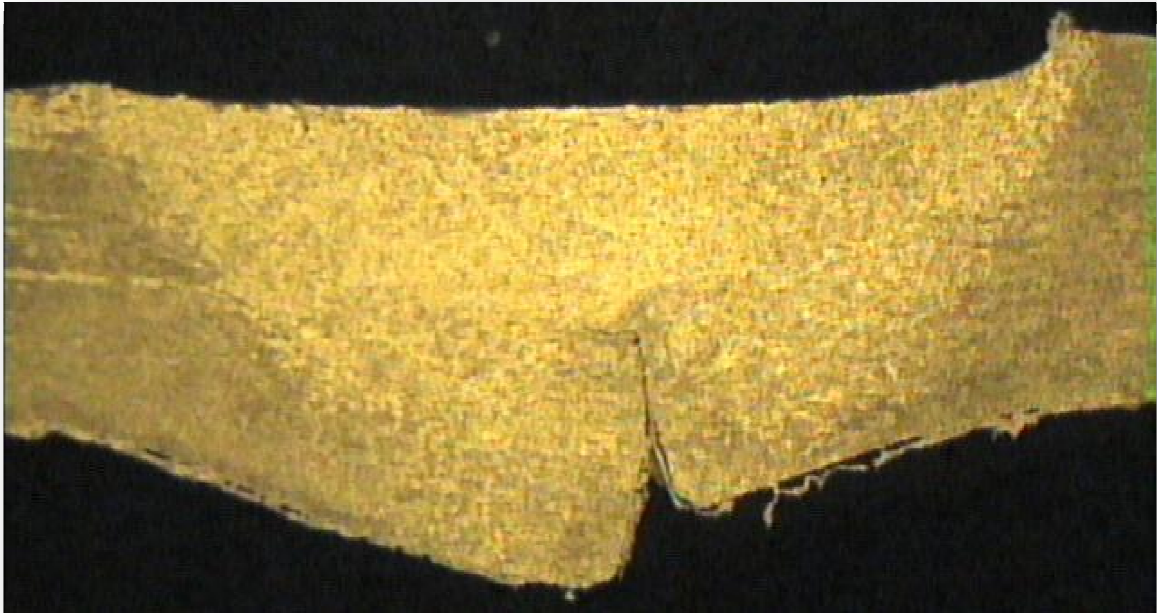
Macrosection view of the split protrusion type defect experienced in cupped shoulder ($\text{\O} 5/8''$), threaded probe ($\text{\O} 0.20''$) tool weld made without a backing ring anvil at 50% material penetration in a butt weld configuration.
